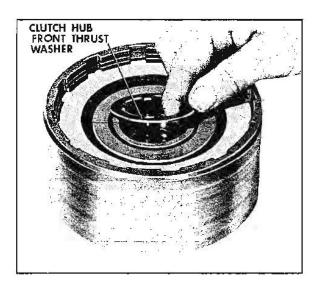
Removing Clutch Hub Front Thrust Washer
